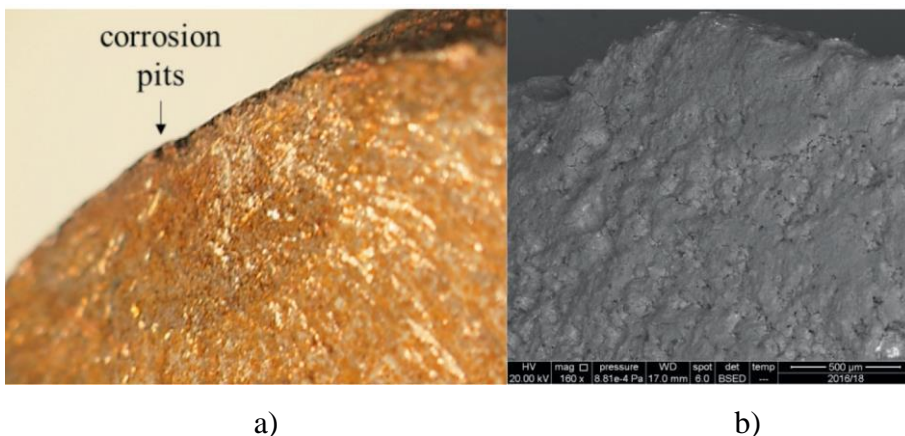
Fracture surface as seen by: a) optical microscope, b) SEM.
